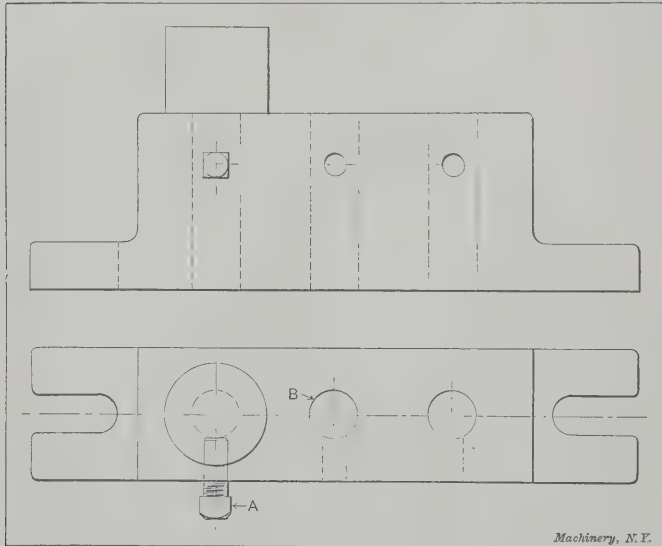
Defective Design of Fixture for Holding Piece shown in Fig. 1
